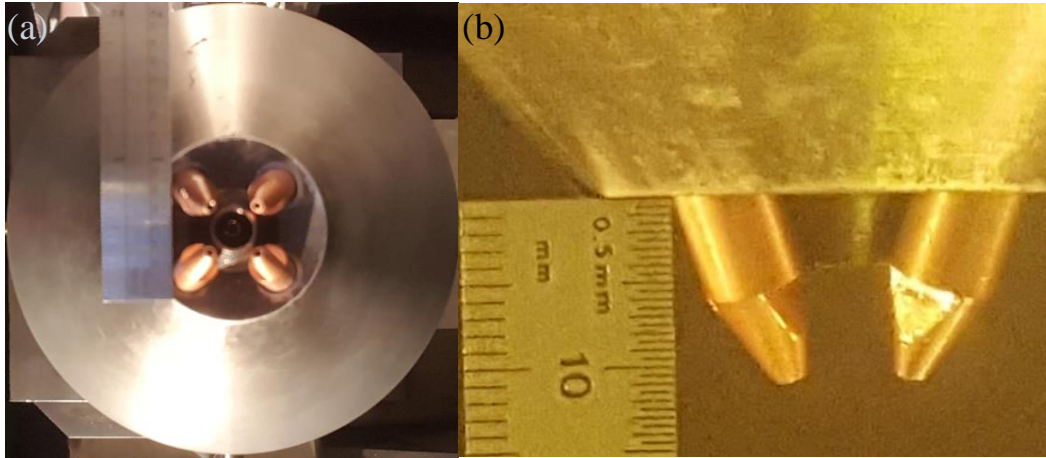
Optomec LENS 750 nozzle geometry – (a) bottom view, (b) side view
